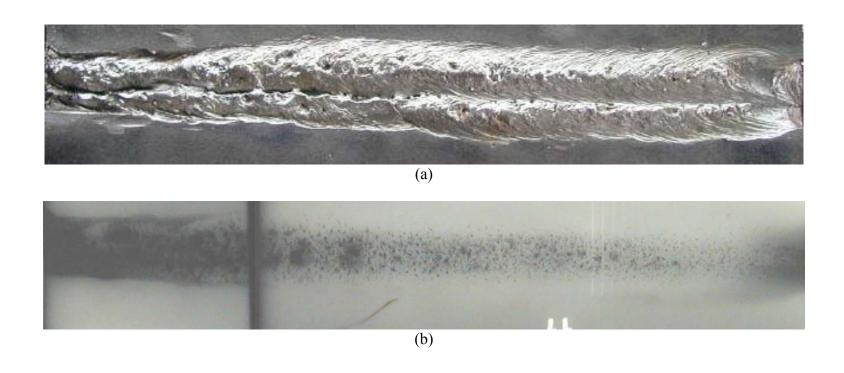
(a) V-groove wet weld deposited with E7024 electrode type on API 5L Gr. B steel at 50 m and (b) its radiographic image.
